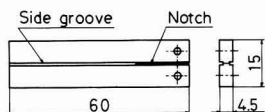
DCB(Double Cantilever Beam) specimen geometry.
